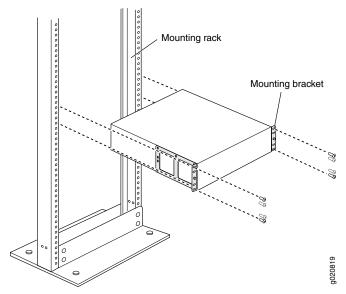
Attaching the Mounting Bracket Along the Front of the Switch
